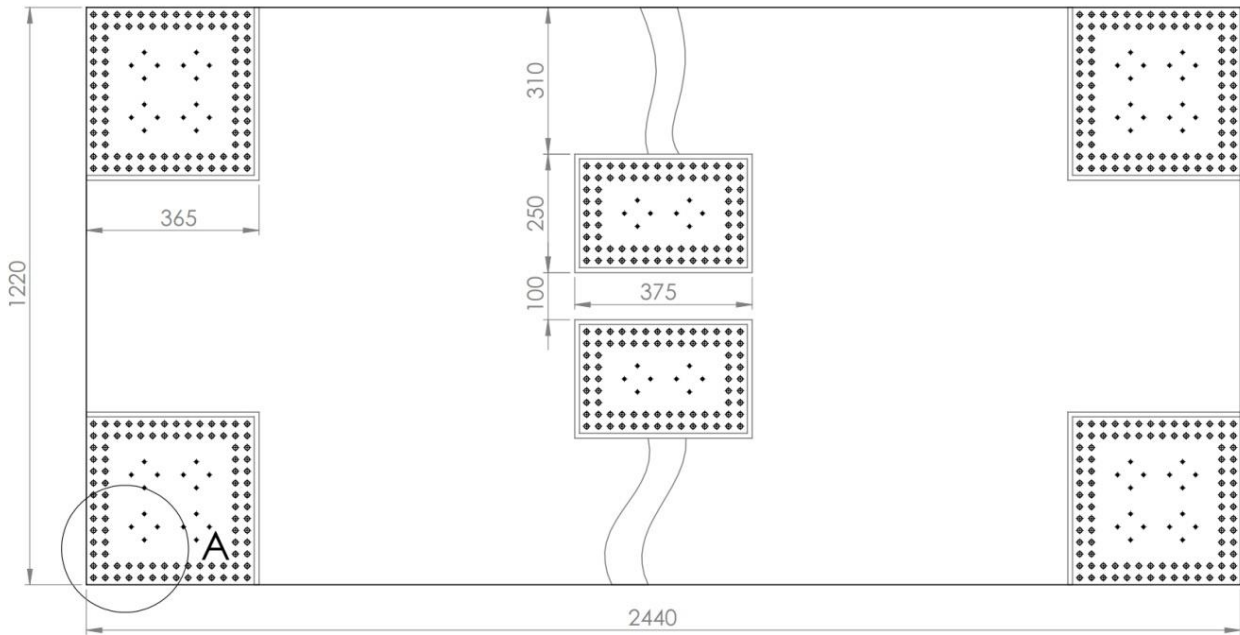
Baseboard dimensions, as designed – manufactured to ± 1 mm tolerance
